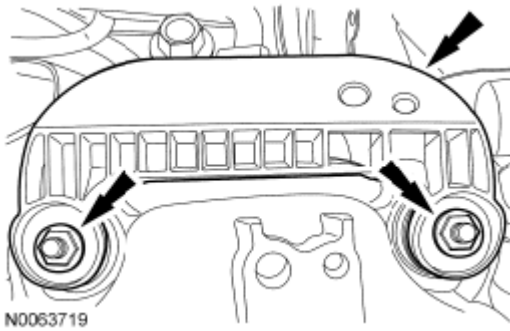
Locating Wiring Harness Retaining Bracket & Nuts
